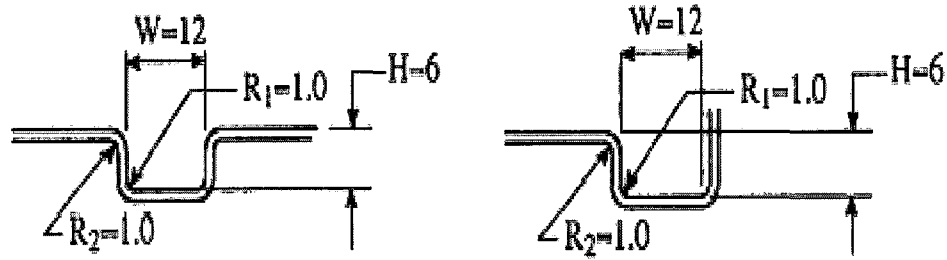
Drawbead Shapes: Lock bead and Lockstep and Their Sizes
